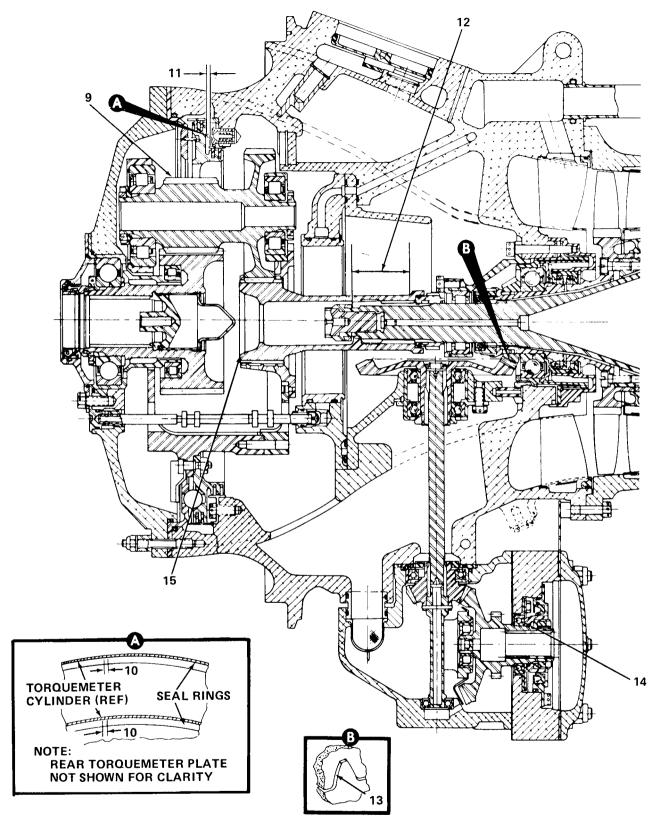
Fits, Clearances and Backlashes (T53-L-11 Series Engines) (Sheet 2 of 5)
